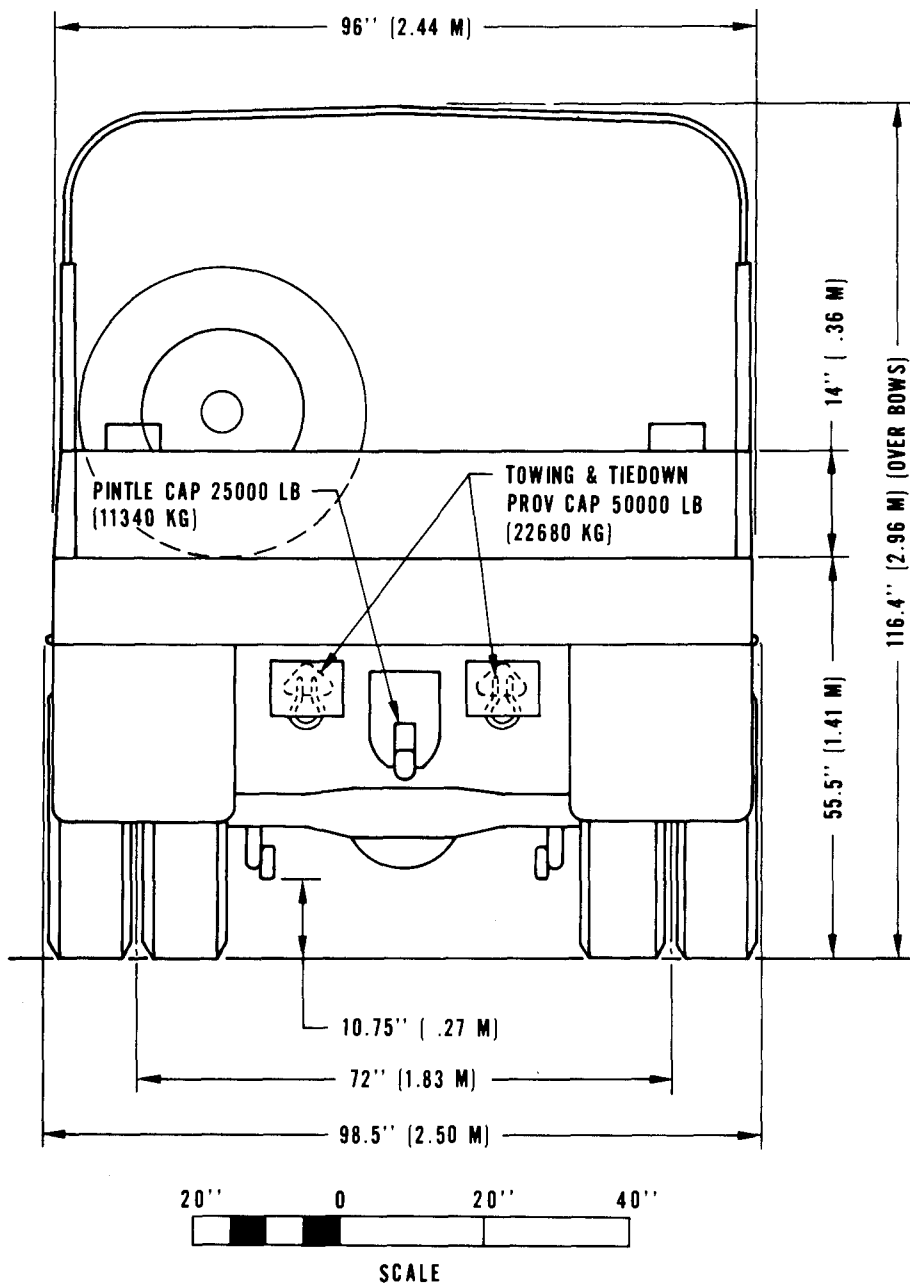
, Rear elevation, truck, cargo, dropside, M54A2C.
